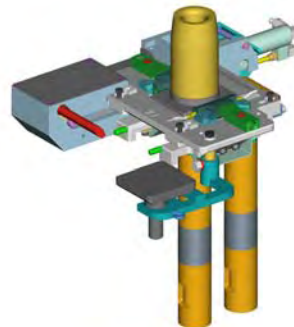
Push-bar with Hydraulic Drive = "HP" version
